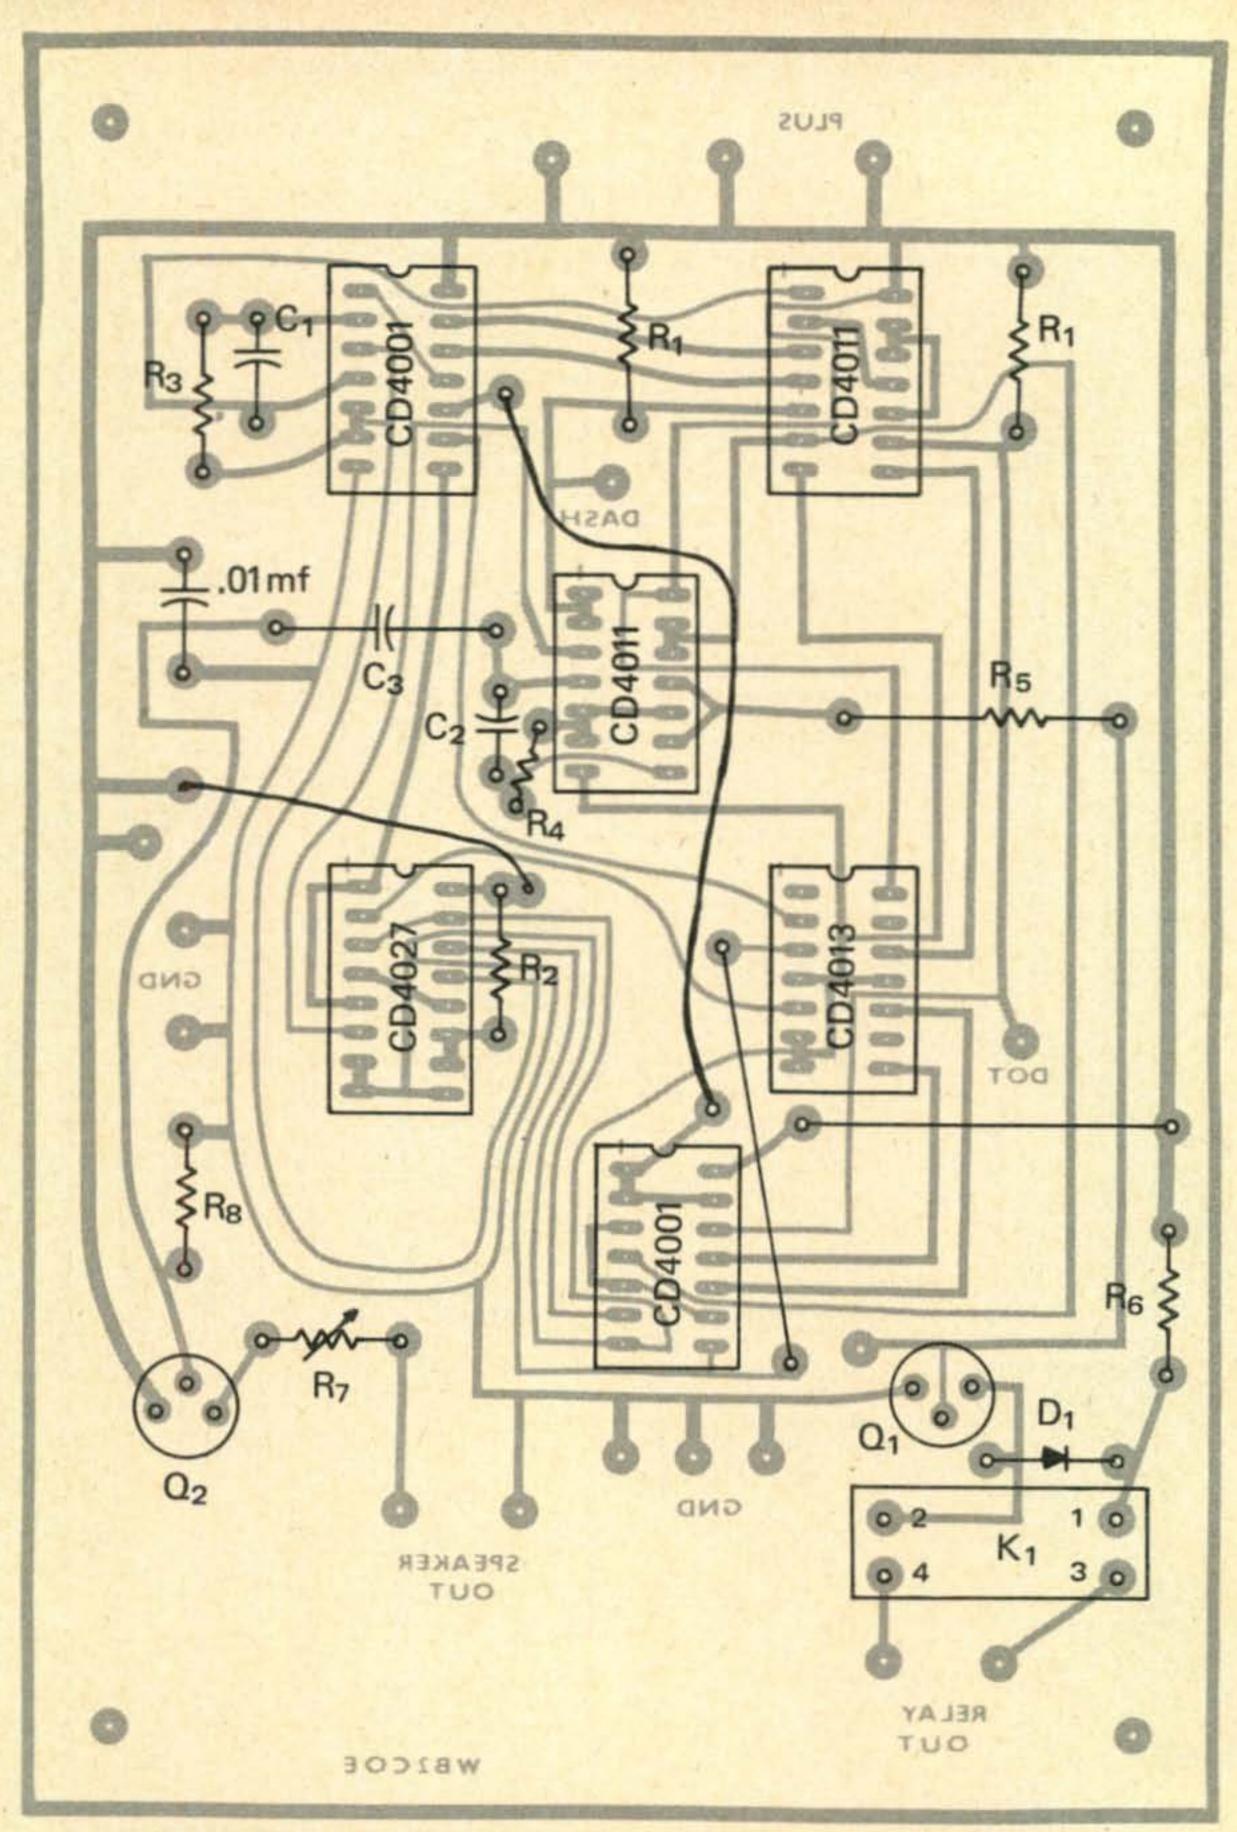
B—Full-size parts layout for Version II keyer, component side.
